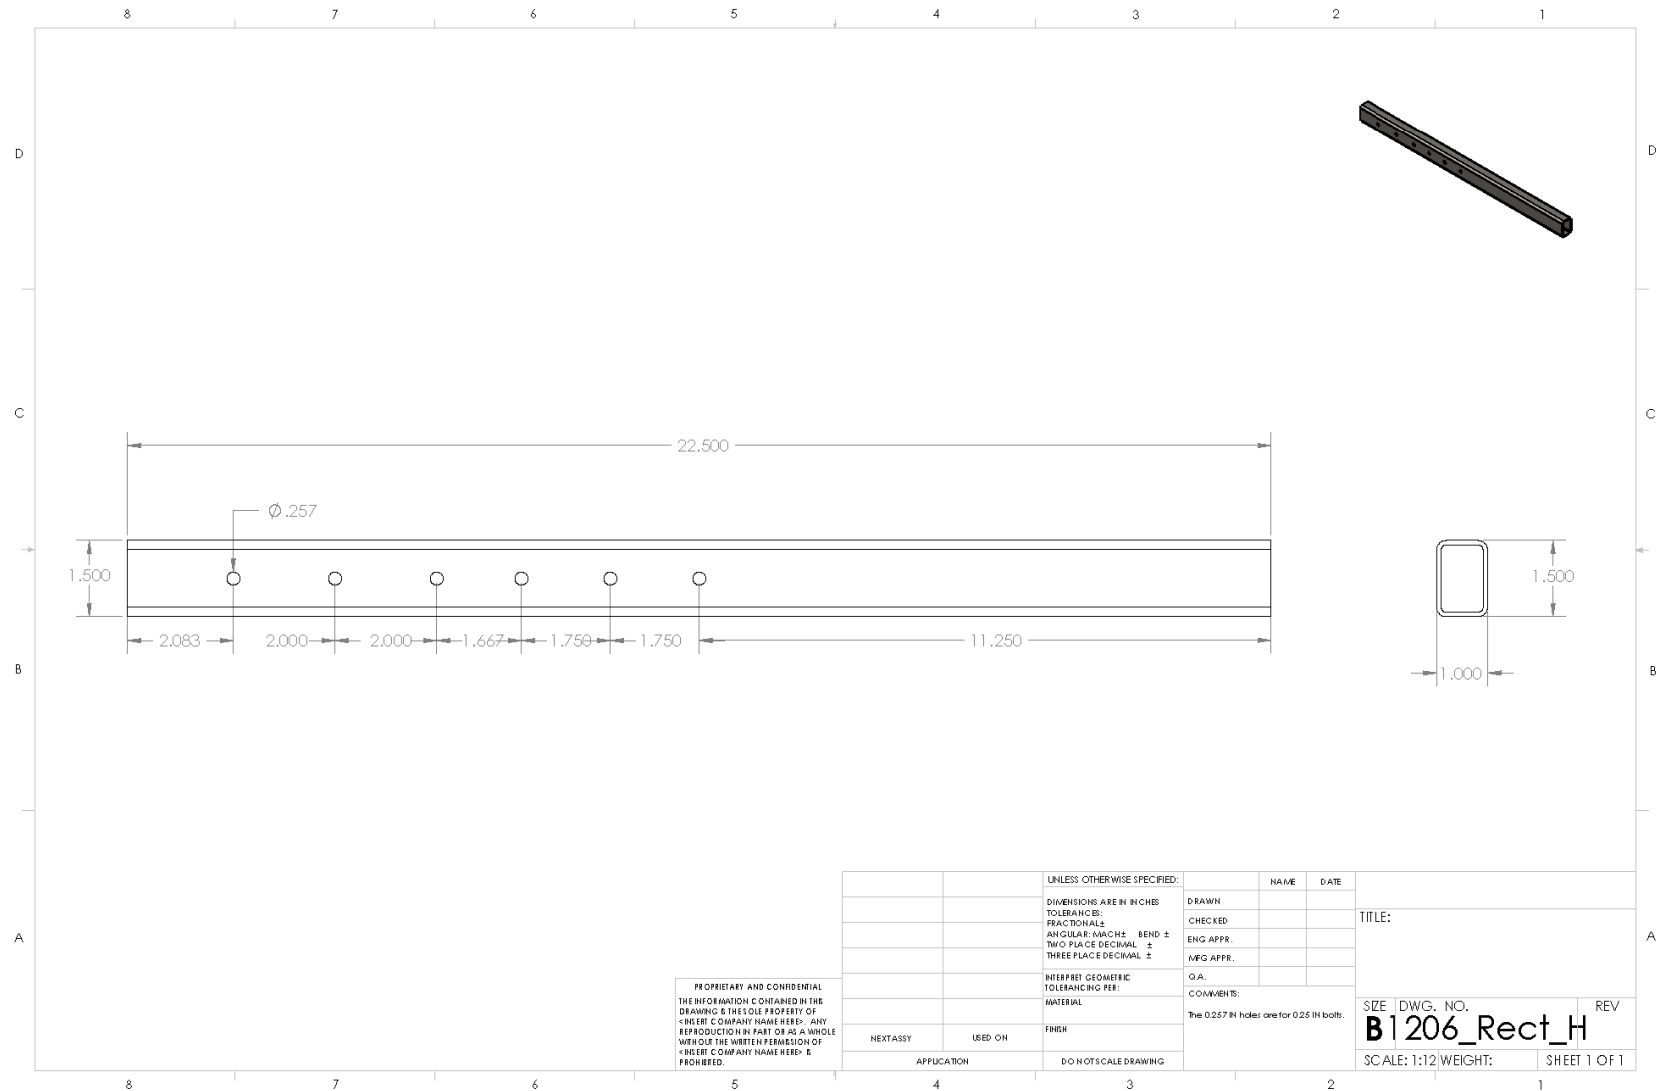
Drawing of Part 1206 with Holes for Mounting Plates
